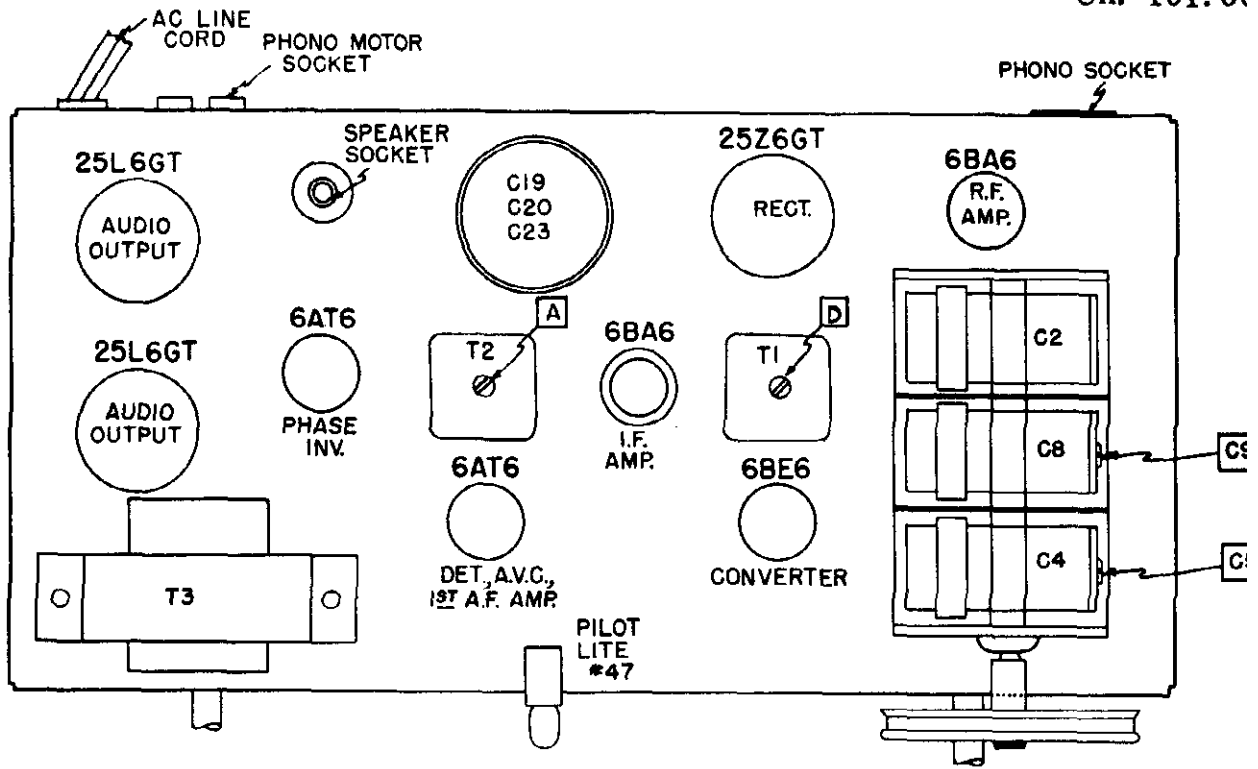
RADIO CHASSIS LAYOUT - TOP VIEW
